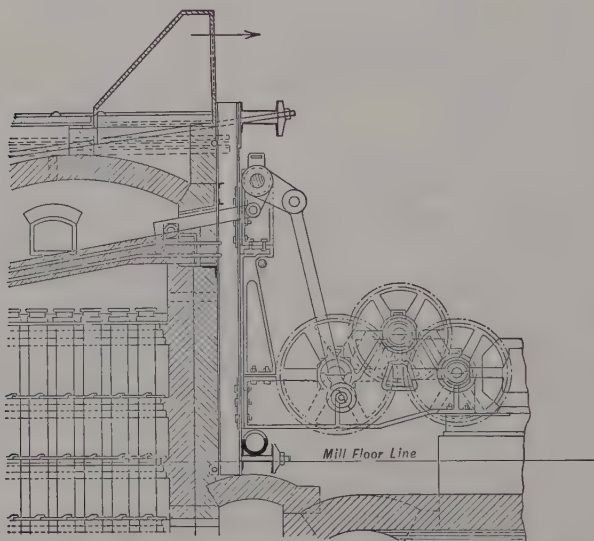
Motor-operated crank-type pusher for continuous furnaces.
